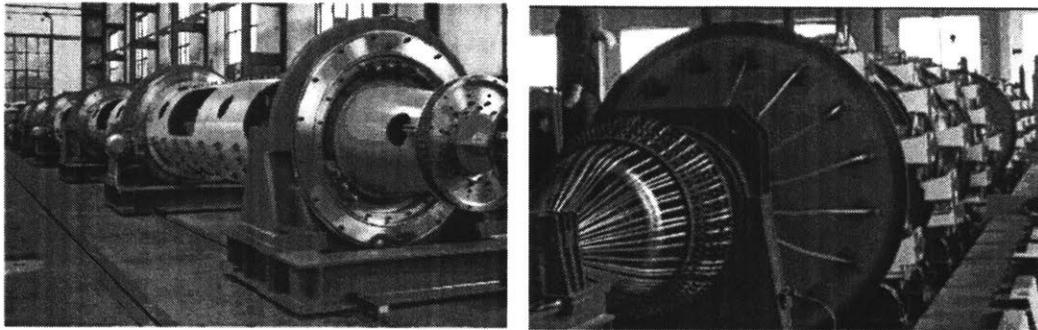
(Left) A tubular stranding machine terminated with a closing die.¹⁵ (Right) A planetary stranding machine.¹⁶
